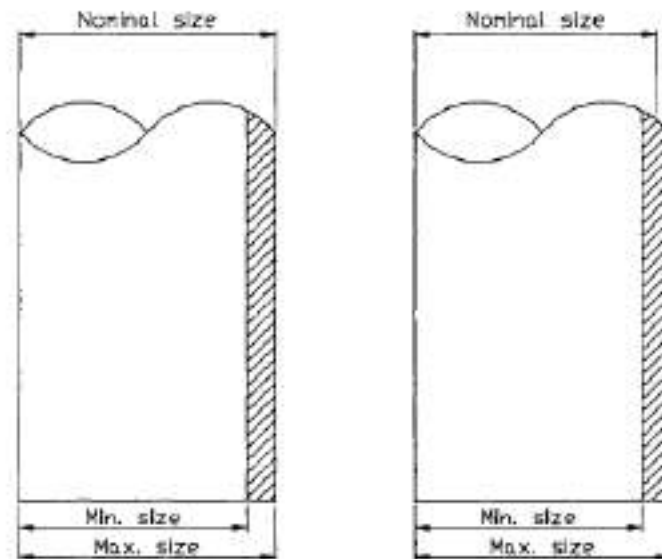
Bilateral and unilateral dimensional tolerances
